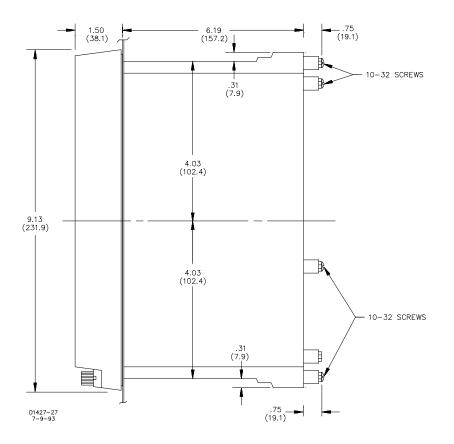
S1 Case, Double-Ended, Semi-Flush Mounting, Outline Dimensions, Side View
